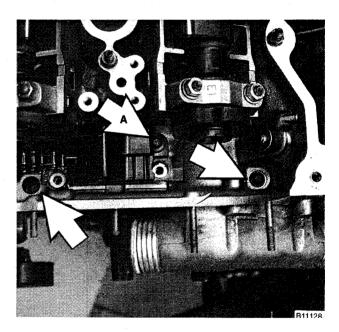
Cylinder head-to-timing chain cover mounting bolts (arrows). (Bolt A also retains secondary chain tensioner.)
